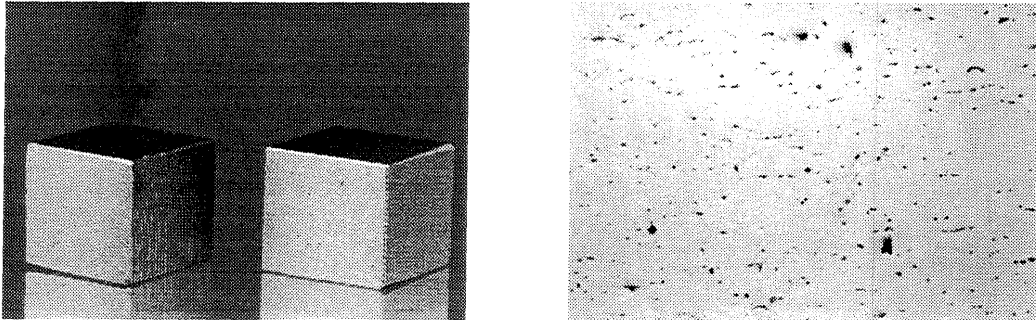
Stainless steel test parts (10 x 10 x 10 mm³) and cross-sectional view
